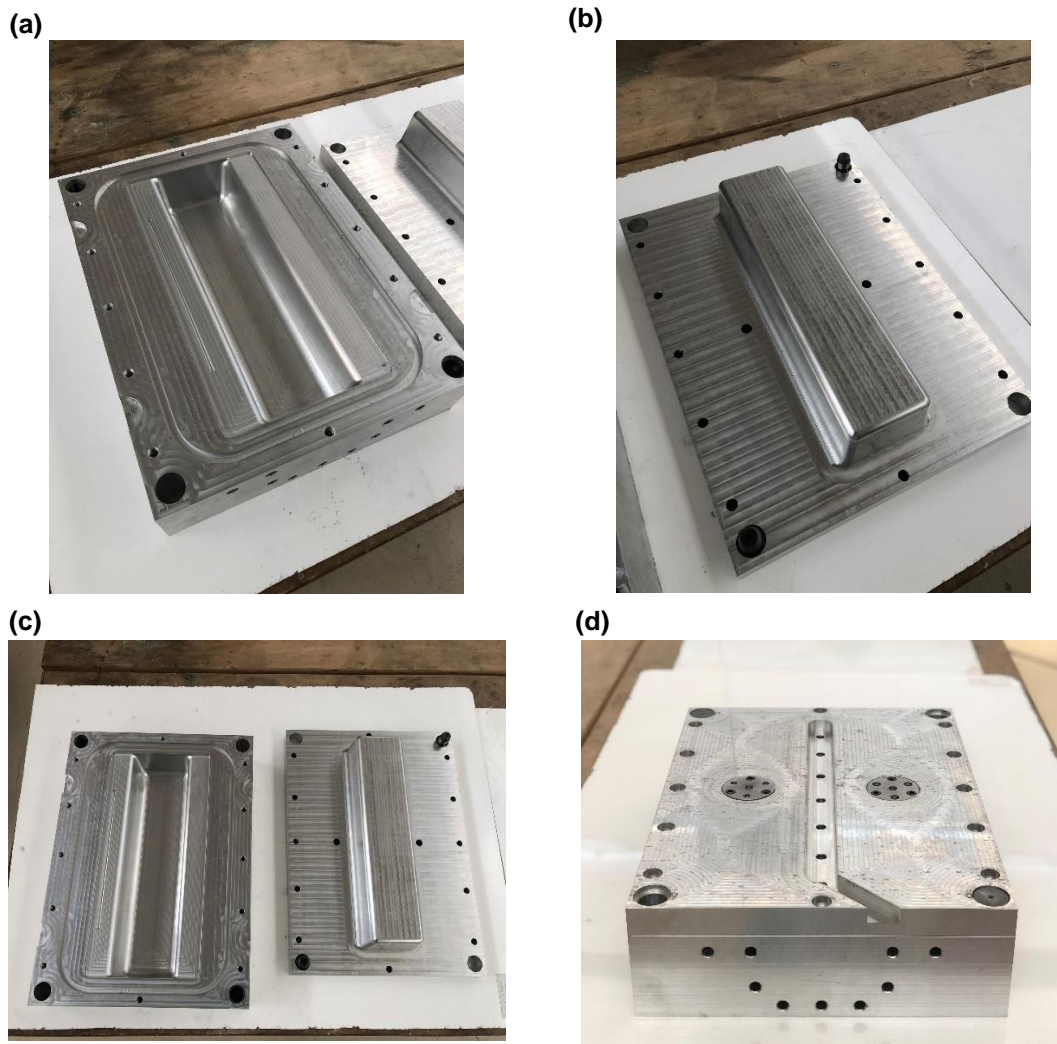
Final aluminium mould (a) Lower part; (b) upper part; (c) both parts and (d) general view.
